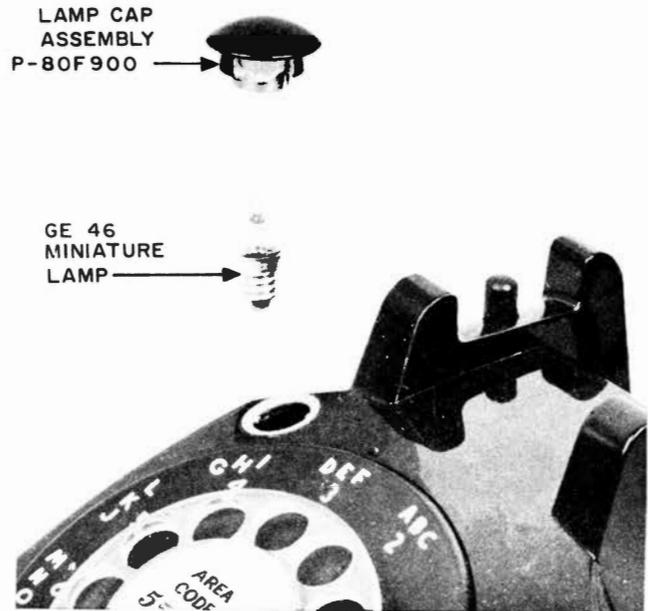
500H, PR, UR, or 501PR, UR Set, Lamp Assembly
